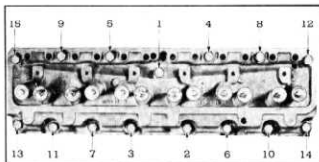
Cylinder Head Bolt Tightening Diagram (1949-52)
